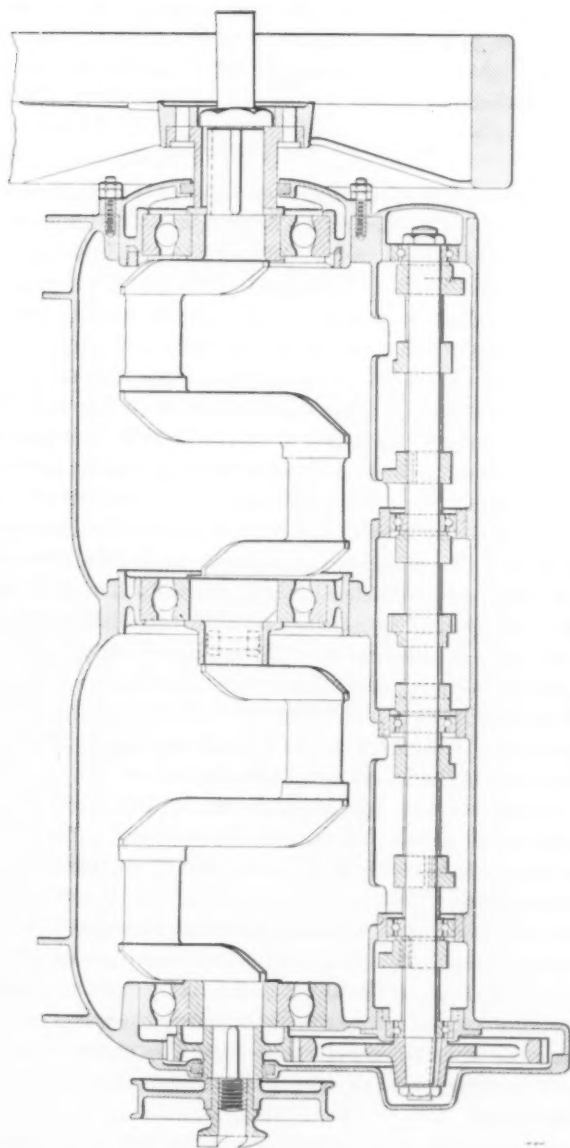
CRANKSHAFT AND CAMSHAFT, F. B. STEARNS CO.
